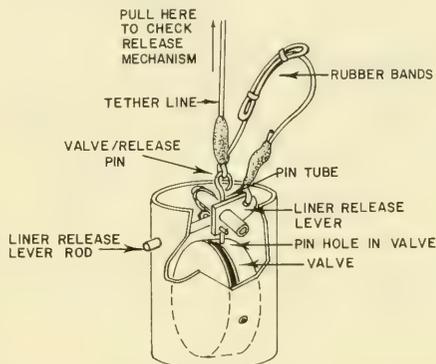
Boomerang corer valve/release mechanism tube (cutaway view).
